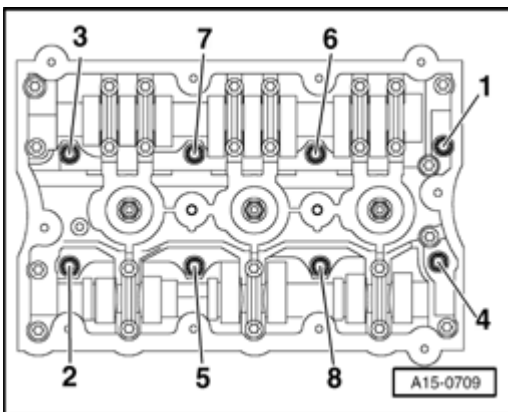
Identifying Cylinder Head Bolts Loosening Sequence
